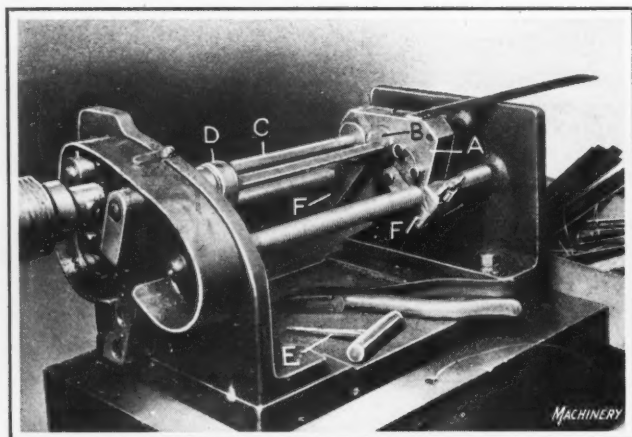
Winding Fixture used on a Lathe for making Rheostat Coils
